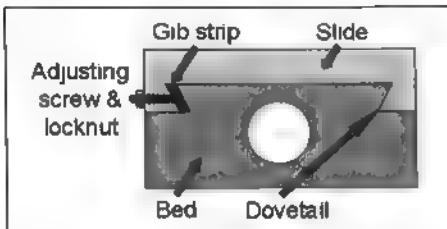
A cross-section through a lathe slide showing the gib strip, adjustment screws and locking nuts.
